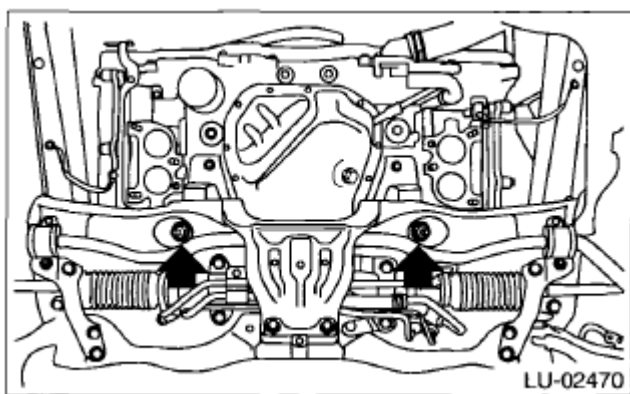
Locating Front Crossmember Engine Mounting Nuts
